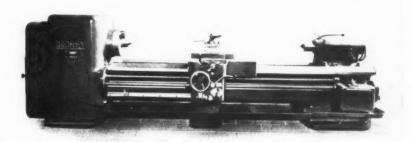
Morey 27-inch Manufacturing Lathe Designed to Use Tungsten-carbide Tools at Maximum Feeds and Speeds
